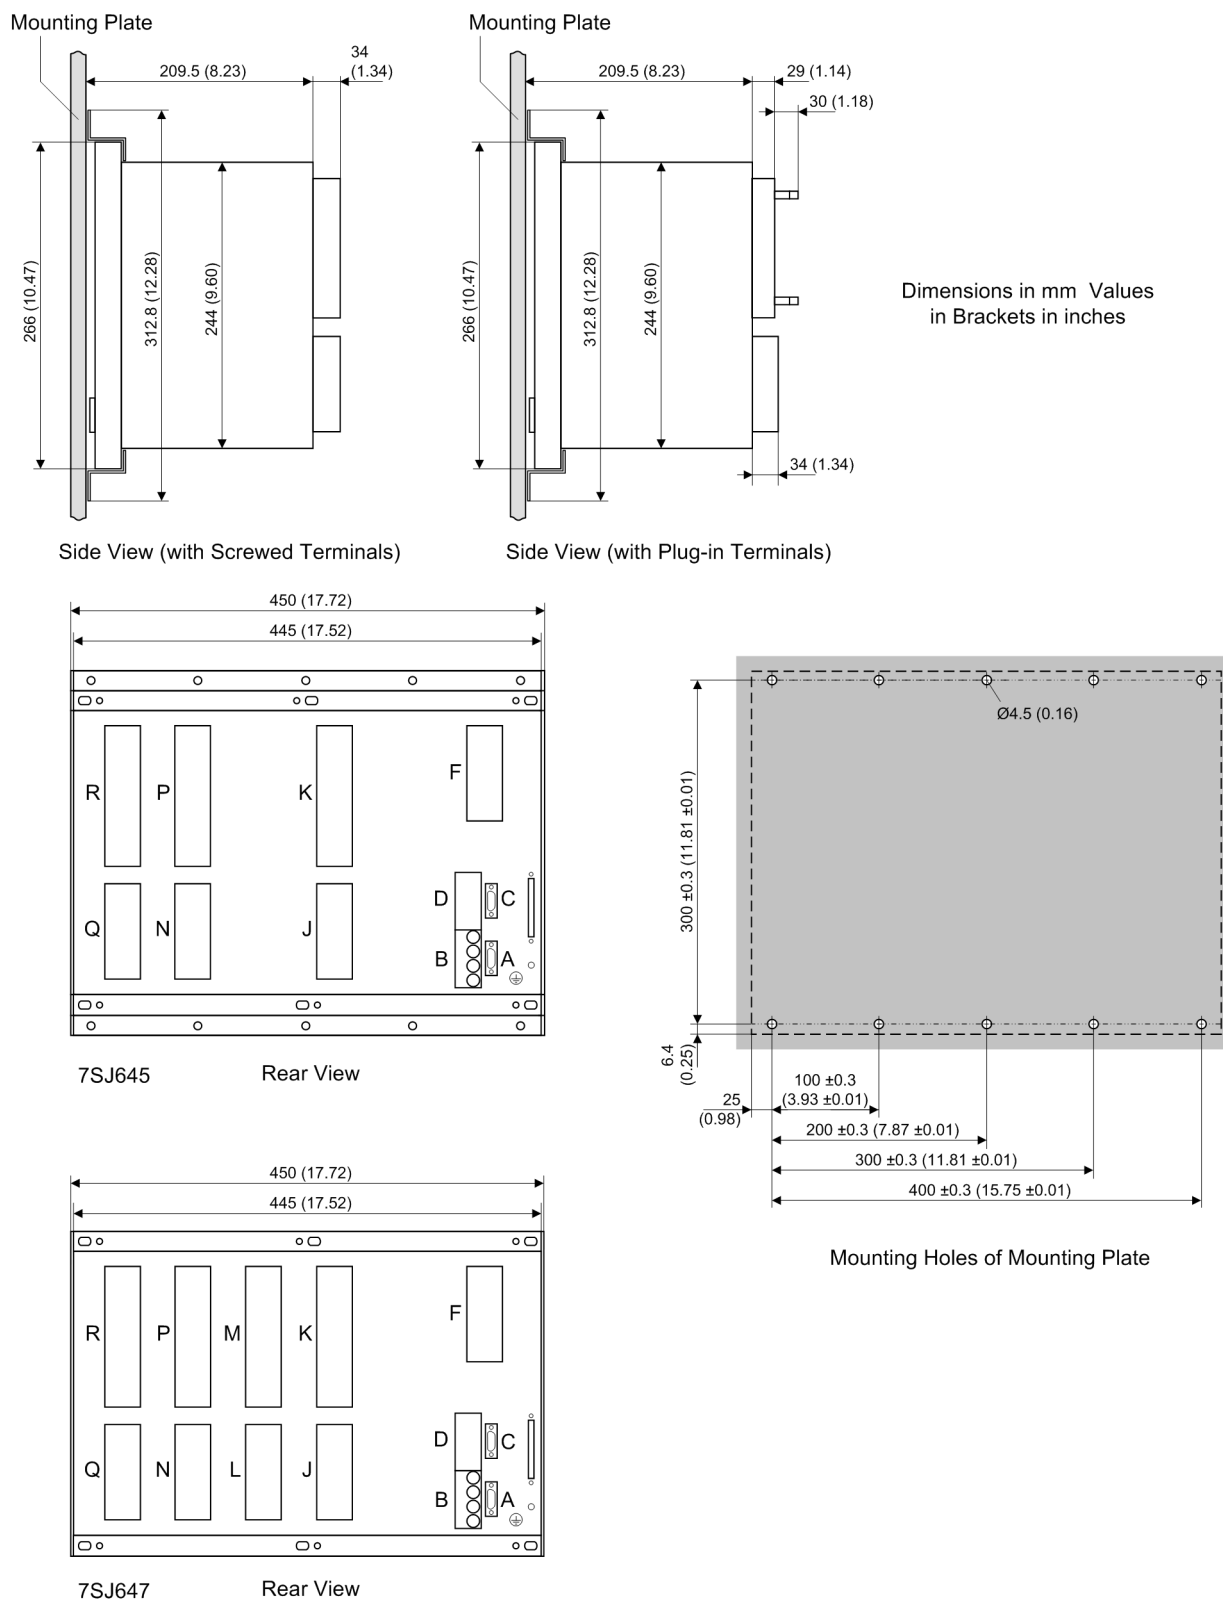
Dimensions 7SJ64 for mounting with detached operator panel or without operator panel (housing size $1\frac{1}{1}$)
